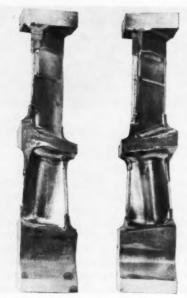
This illustration shows final results. Average of 70 mils has been removed.
